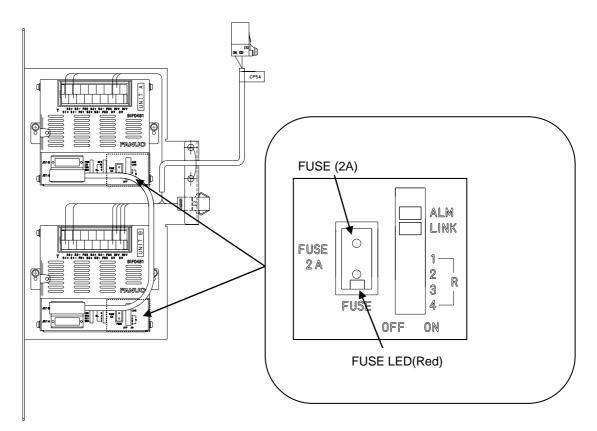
(h) Fuse on sensor I/F unit for CR-35*i*A
